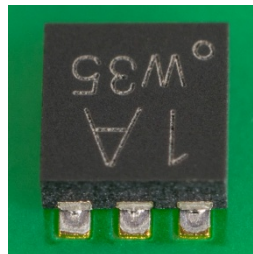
DFN2020MD-6 (SOT1220) – Component D169 with tin-plated wettable side pads
